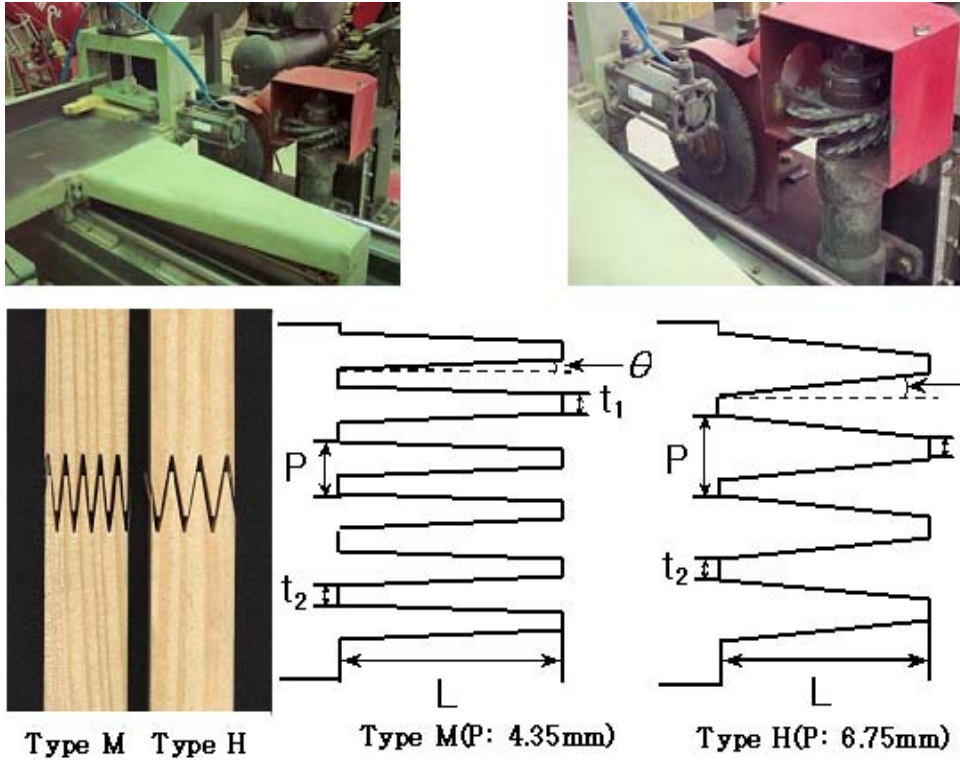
The machine of making finger-joint and profiles of finger-jointed specimens.
